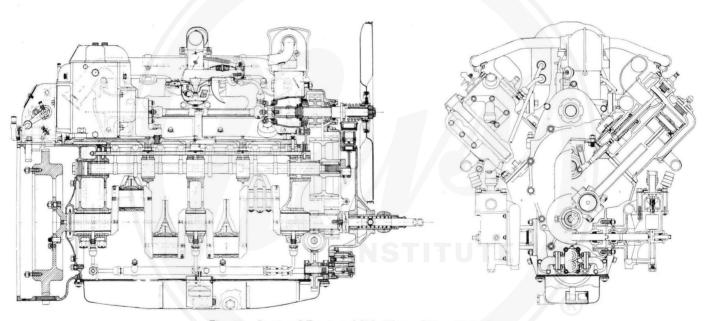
Sectional Front and Side Views of Type 55 Engine.
